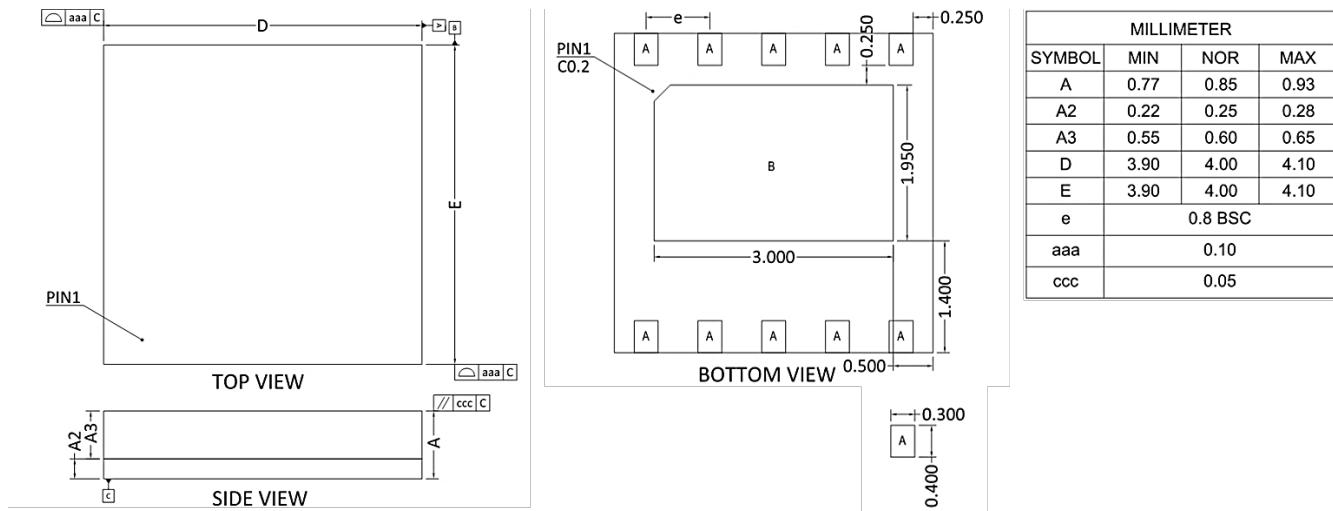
LGA10 4X4 Package Shape and Dimension
